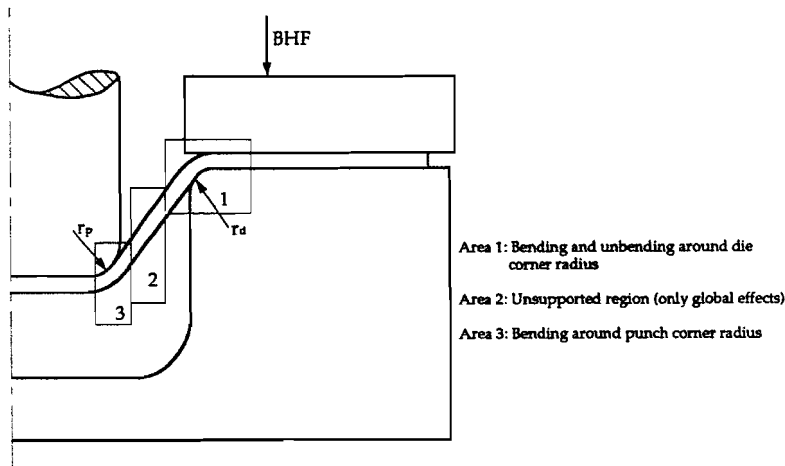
Deep drawing of a round cup with the three bending areas
